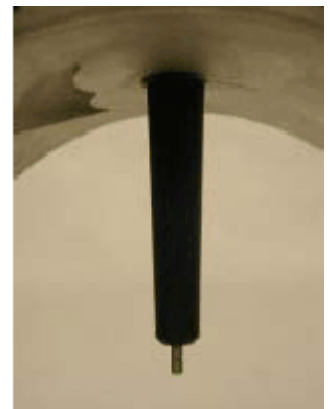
New center casting design / Nouveau modèle de pièce moulée centrale
